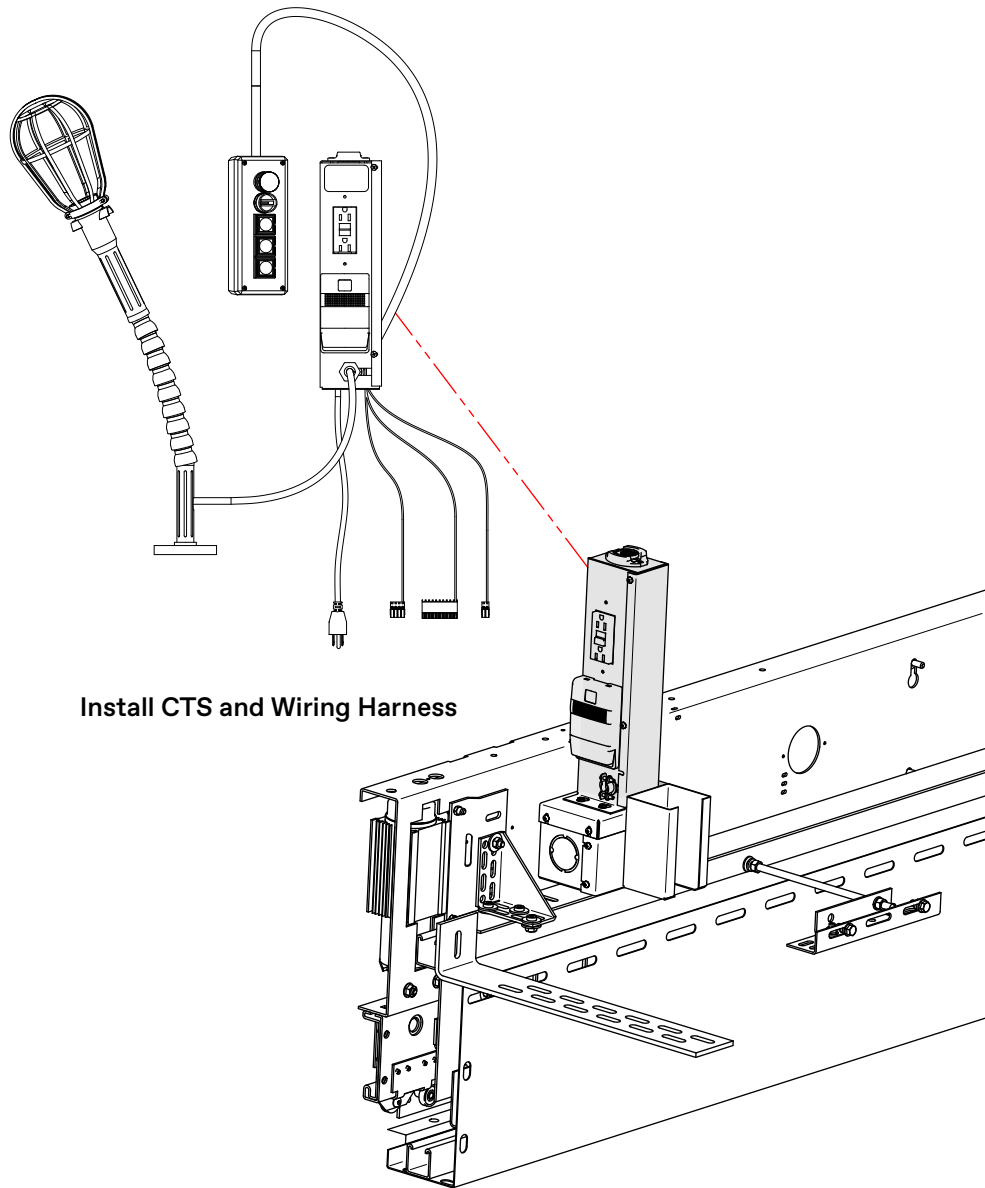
Door Operator, CTS, and Wiring Harness Installation
